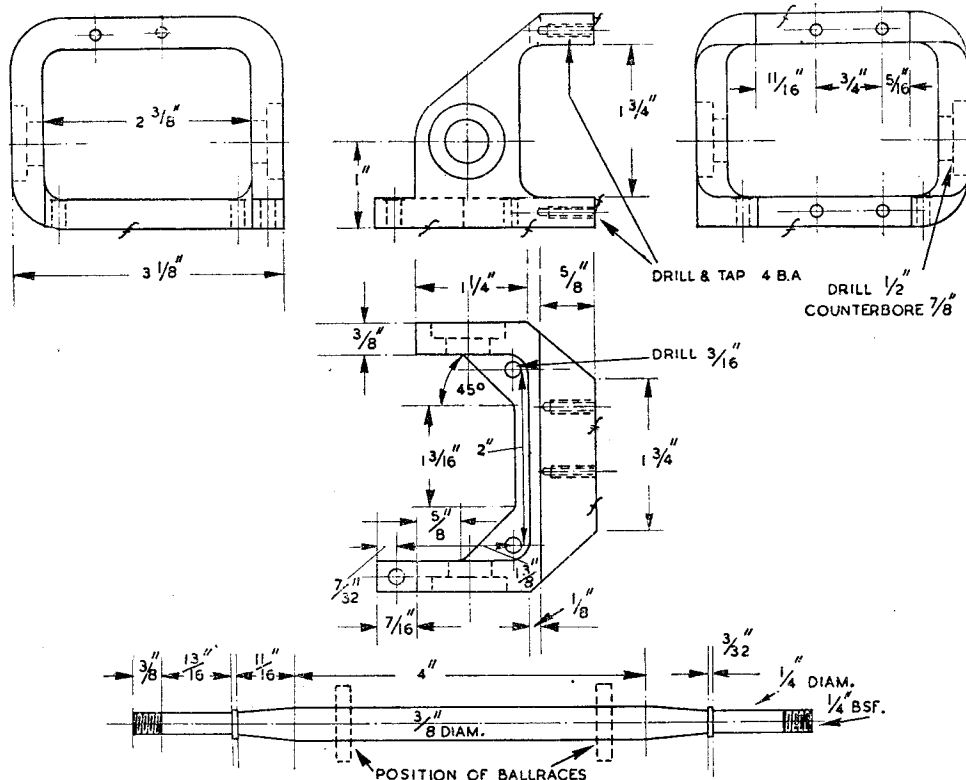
The Z.N. engine mounting bracket and back axle as modified to fit the "M.C.N." Grand Prix Special
